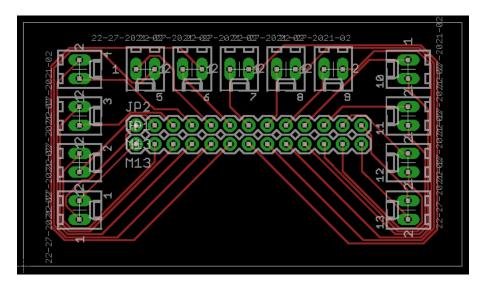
Board Layout of the 26 pin Breakout Board for the Sensoray 826 I/O card
